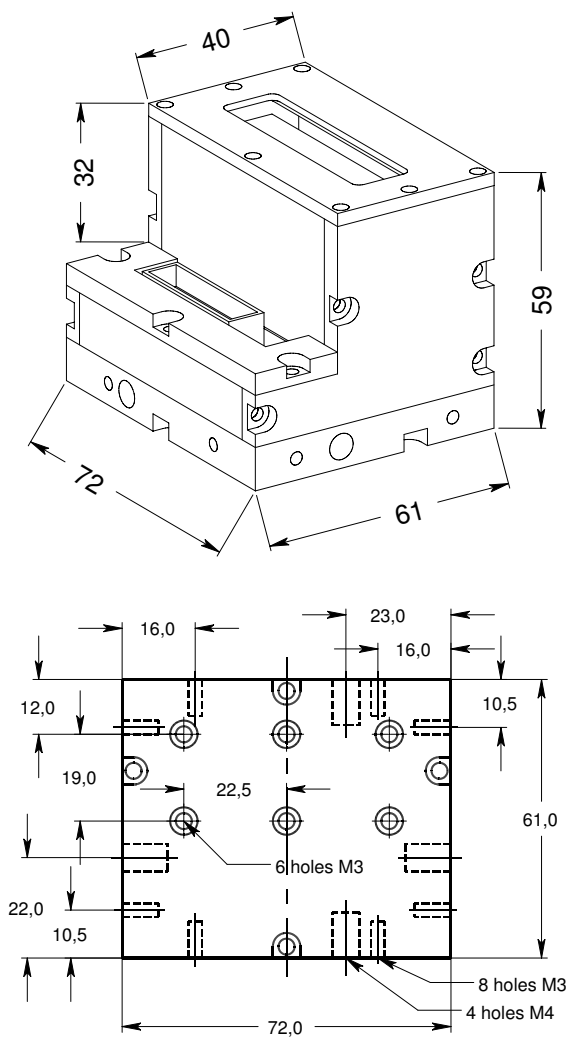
Technical drawing of the package and mounting holes of the 30mm 37-channel PDM
